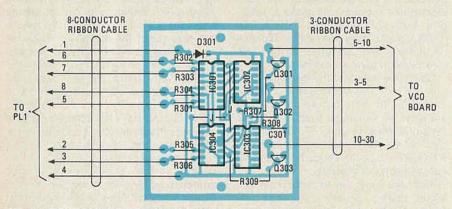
EIGHT-CONDUCTOR RIBBON CABLE is used between the board and PL1. The plug itself is an 8-pin DIP header. If you can't locate one, cut down a 14- or 16-pin header.
